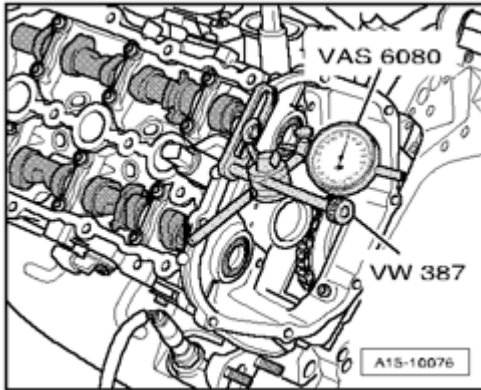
Securing Dial Gauge Holder VW 387 To Dial Gauge VAS 6080 On Cylinder Head
